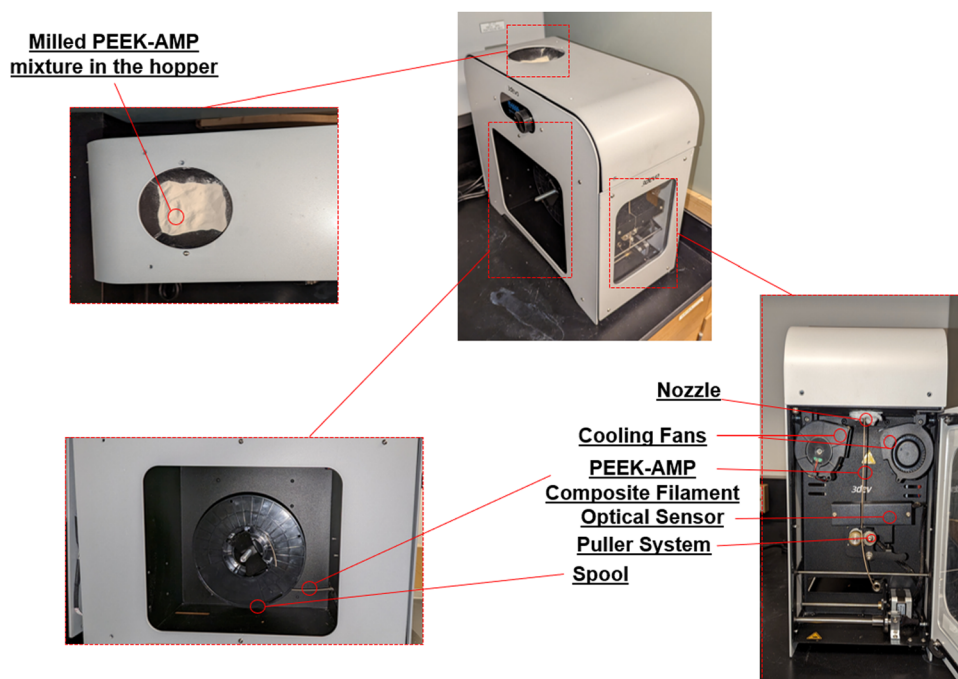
Setup of the single-screw filament extruder used for forming the PEEK-AMP composite filaments.
